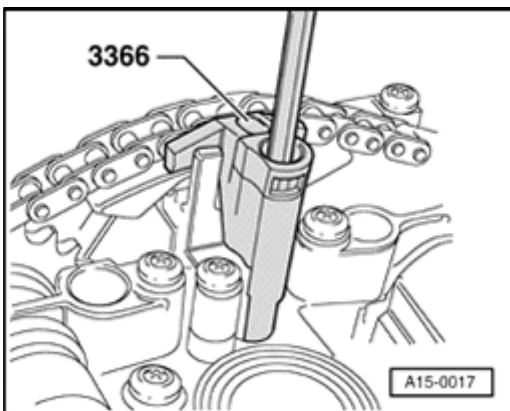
Securing Camshaft Adjuster Or Chain Tensioner Using Bracket For Chain Adjustment 3366
